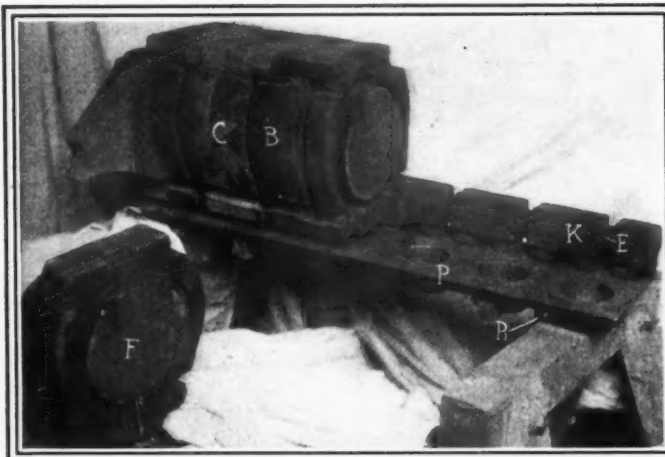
Using a metal plate P on which the sand core pieces F are mounted in order to obtain accuracy in castings. It is essential that the core forming the opening in the center of the crankcase as well as forming the holes for the camshaft and crankshaft bearings be accurate. The plate shown is for a six-cylinder motor and the three large holes in the foreground show the cylinder openings
